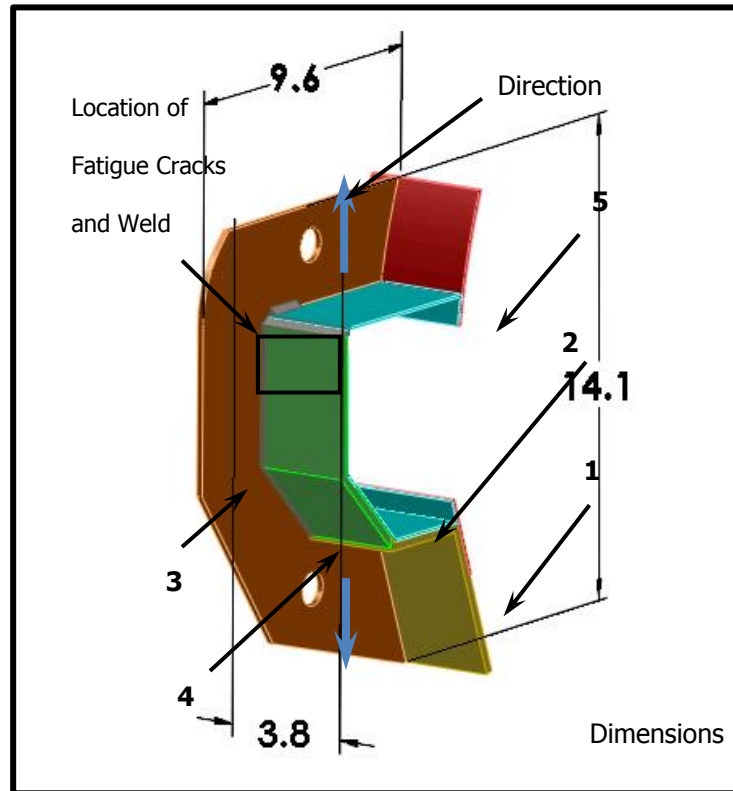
View of the test specimen overall dimensions, and direction of load. (1) formed plate, (2) 5-bend box, (3) outer rib, (4) formed plate, (5) blade sheet.
